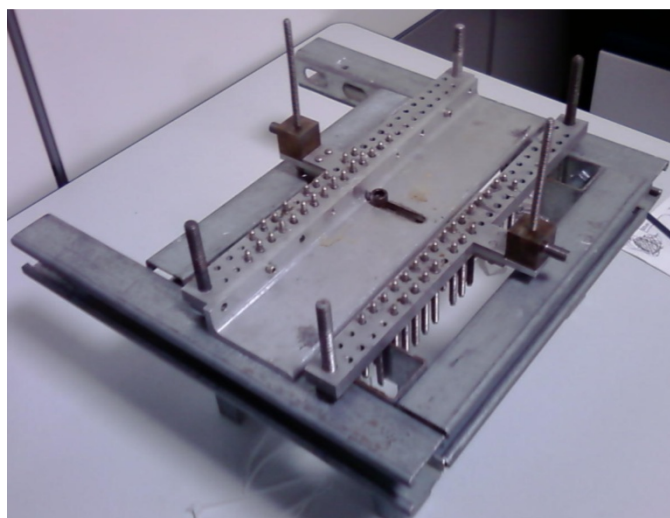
Picture of the alignment tool designed for this project with one side of the spiked clamps in position.
